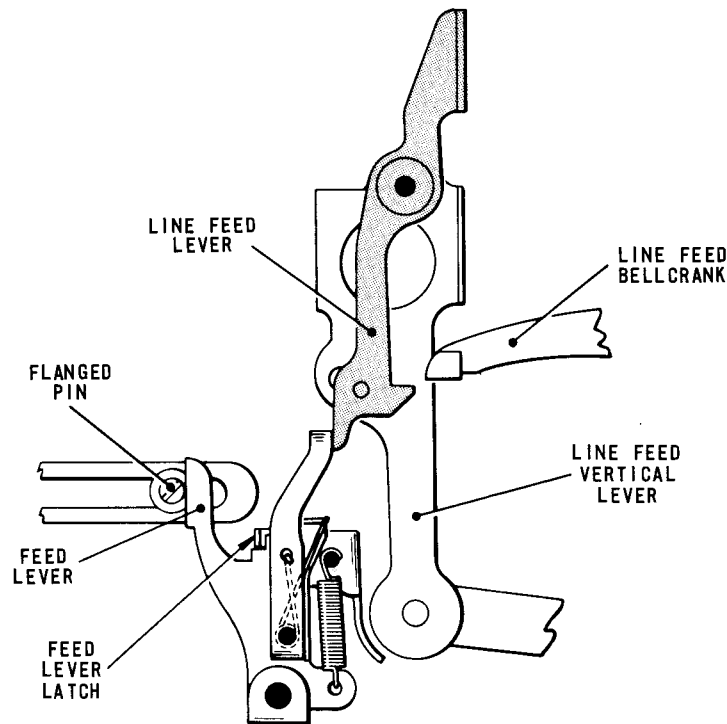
AUTOMATIC CARRIAGE-RETURN/LINE-FEED MECHANISM
